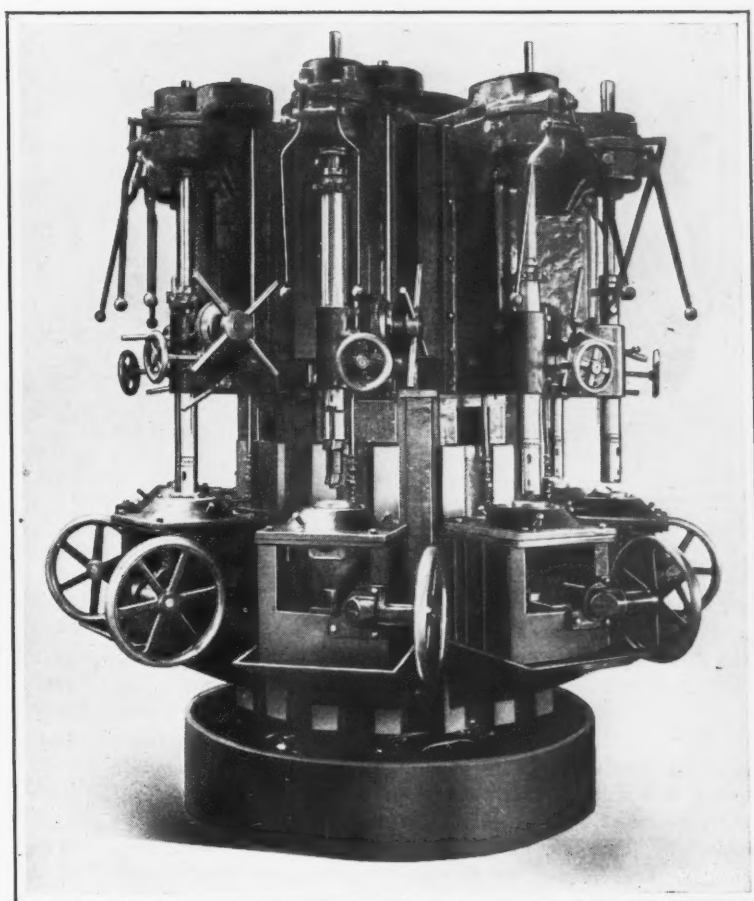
Baker Bros. Rotary Drilling and Boring Machine
